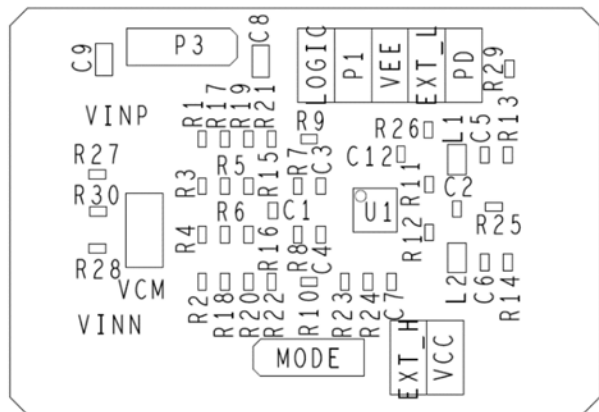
ADA4945-1CP-EBZ Evaluation Board Assembly Drawing, Primary Side
